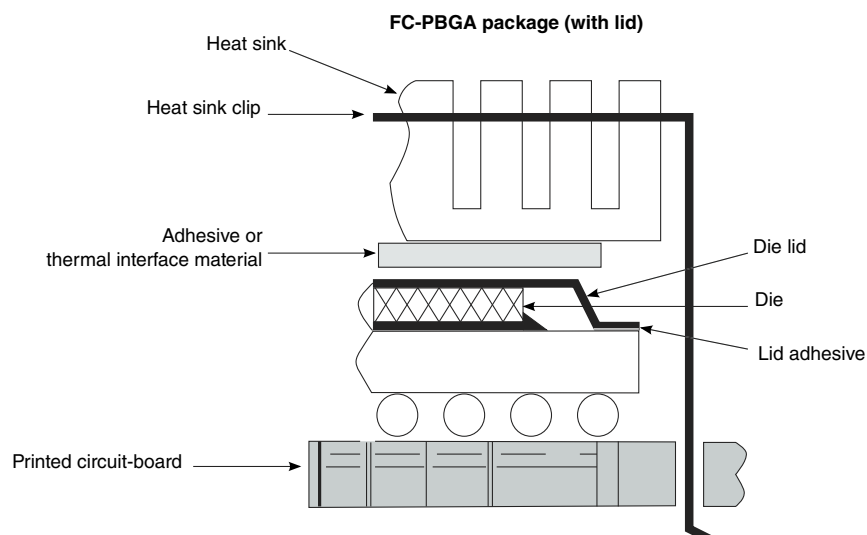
Package exploded, cross-sectional view-FC-PBGA (with lid)
